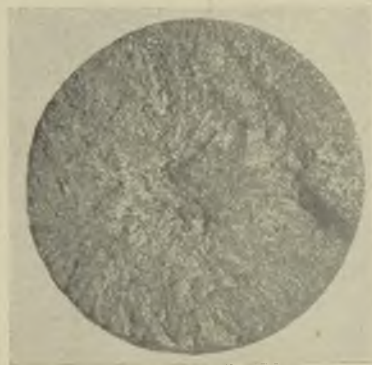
FRACTURE OF SEVERAL TRANSVERSE TEST PIECES TO THE DIMINISHING SIZE OF PIPE. $\times 15$.
